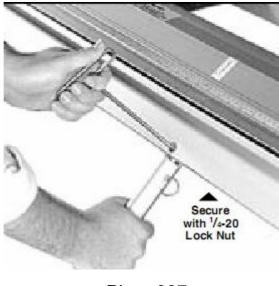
The Hinge Clip keeps the Moving Hinge in position for ease of aligning material.
